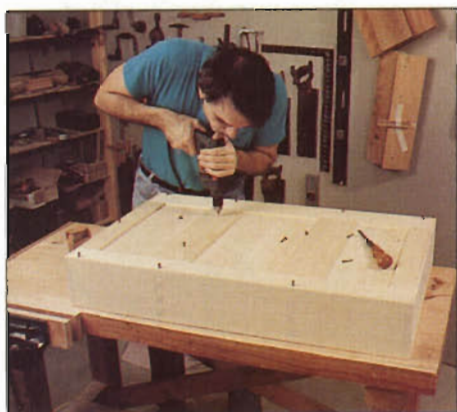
Photo N: Lay out divider centerlines on the middle stiles, then screw the frame-and-panel back into the rabbeted recess. Angle the screw holes slightly outward around the edge.
